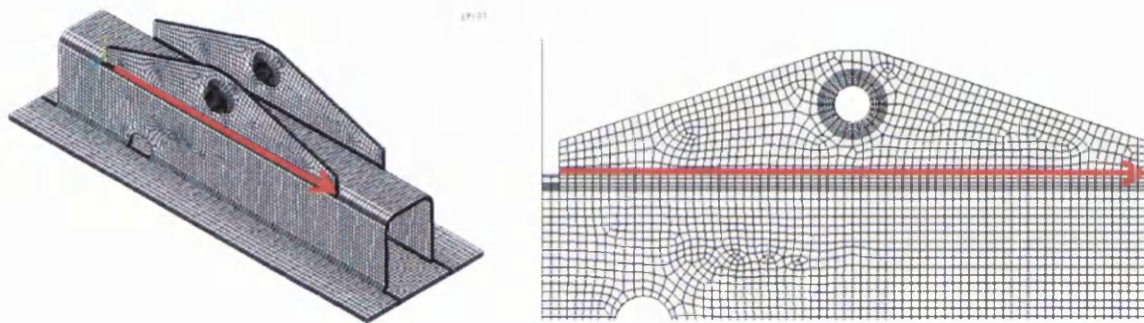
Middle weld upper and lower toe for structural stress calculation - attachment plate to top-hat section
